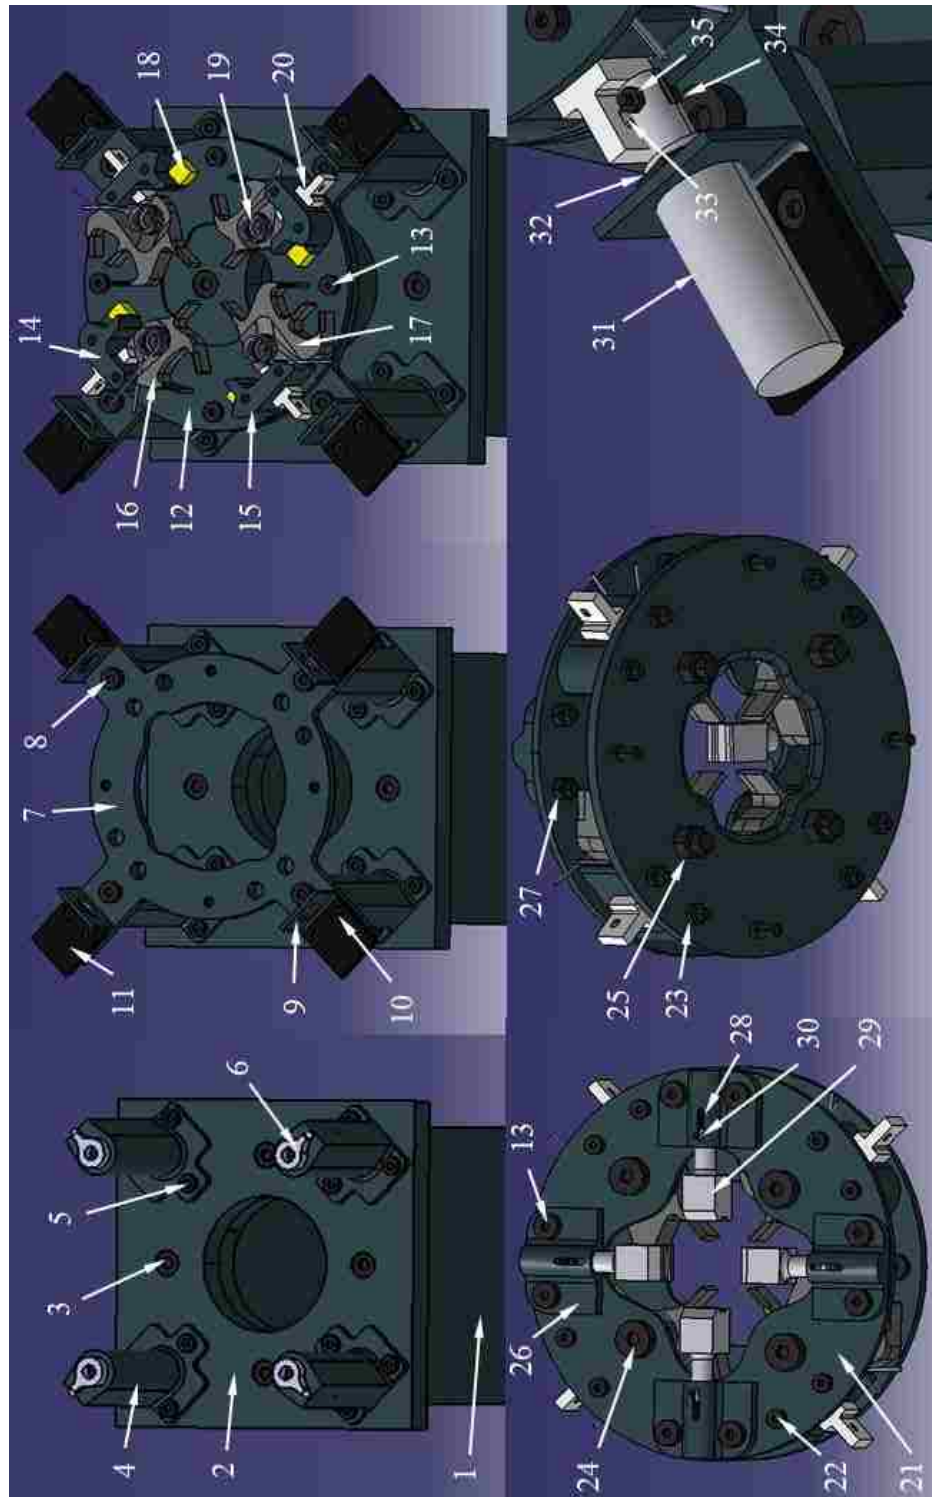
Assembly of Quadrotor Adaptive Cutter.
